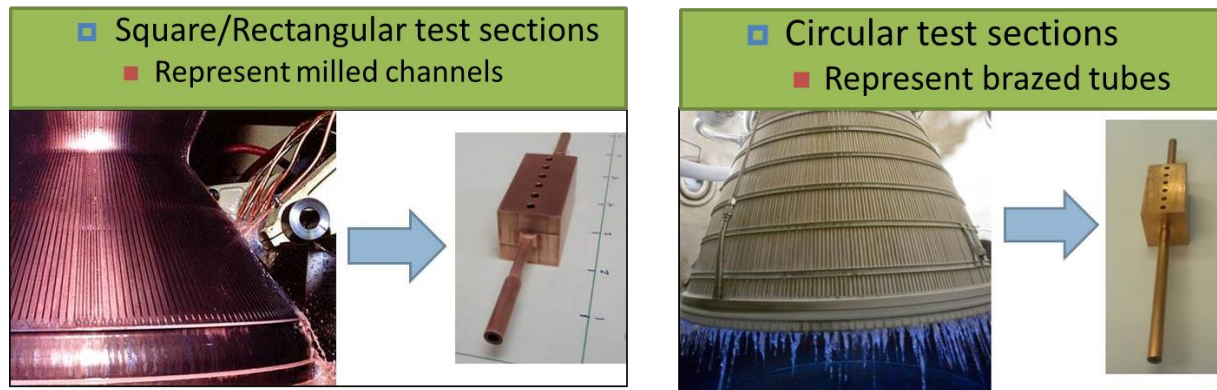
2: Types of cooling channel geometries; milled (left), and brazed (right).
